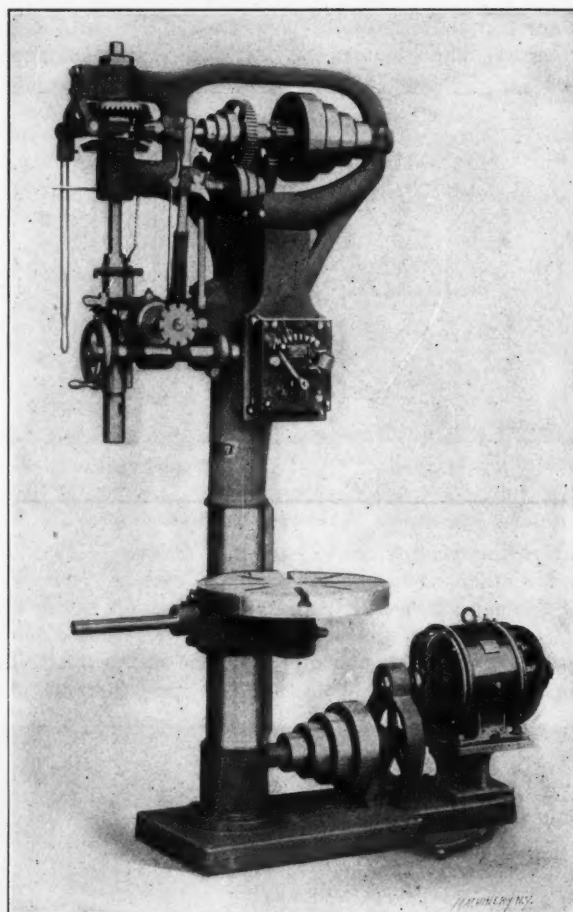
Motor Starter and Board for Switch Mounted on a Drill Press
